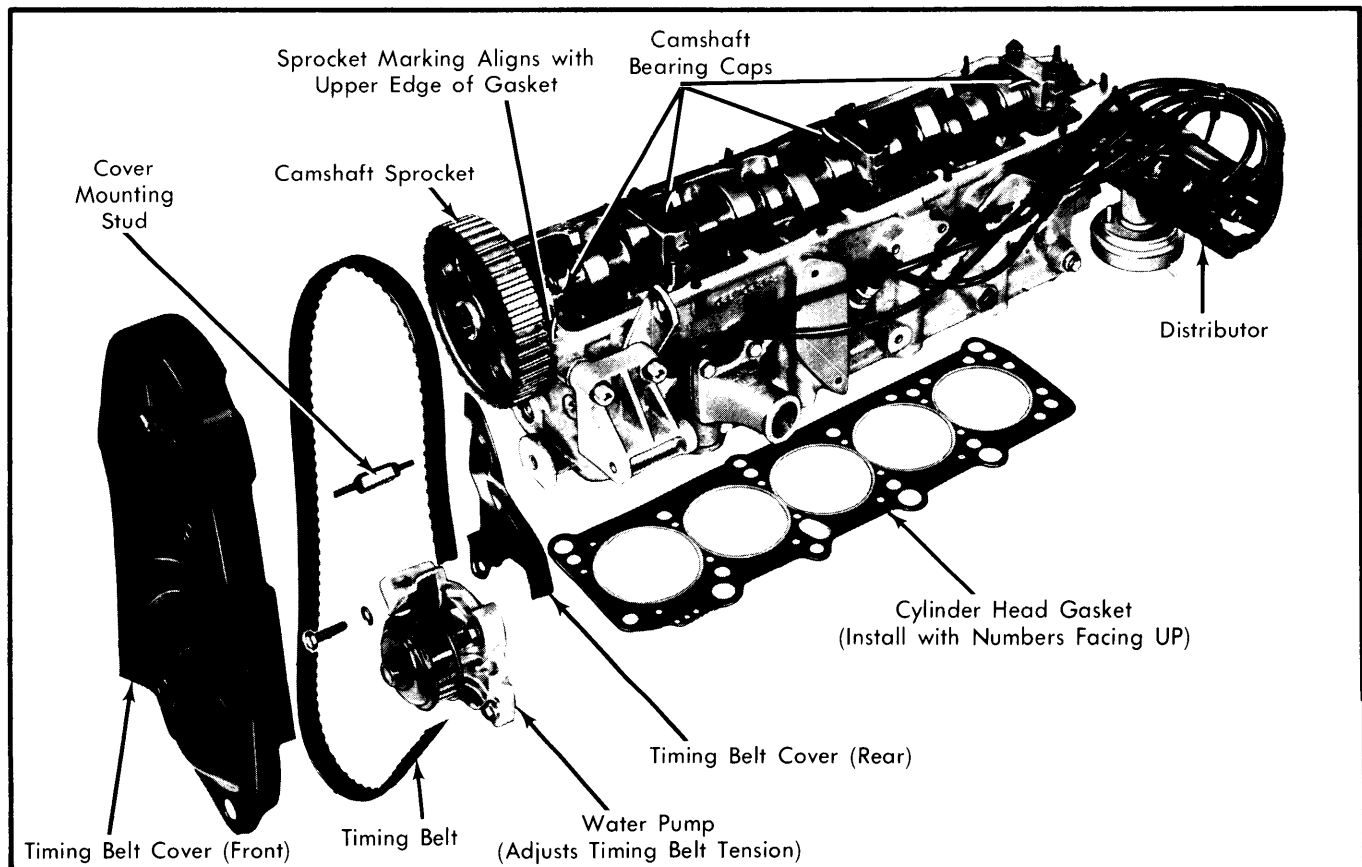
Cylinder Head and Camshaft Assembly with Timing Belt and Cover
